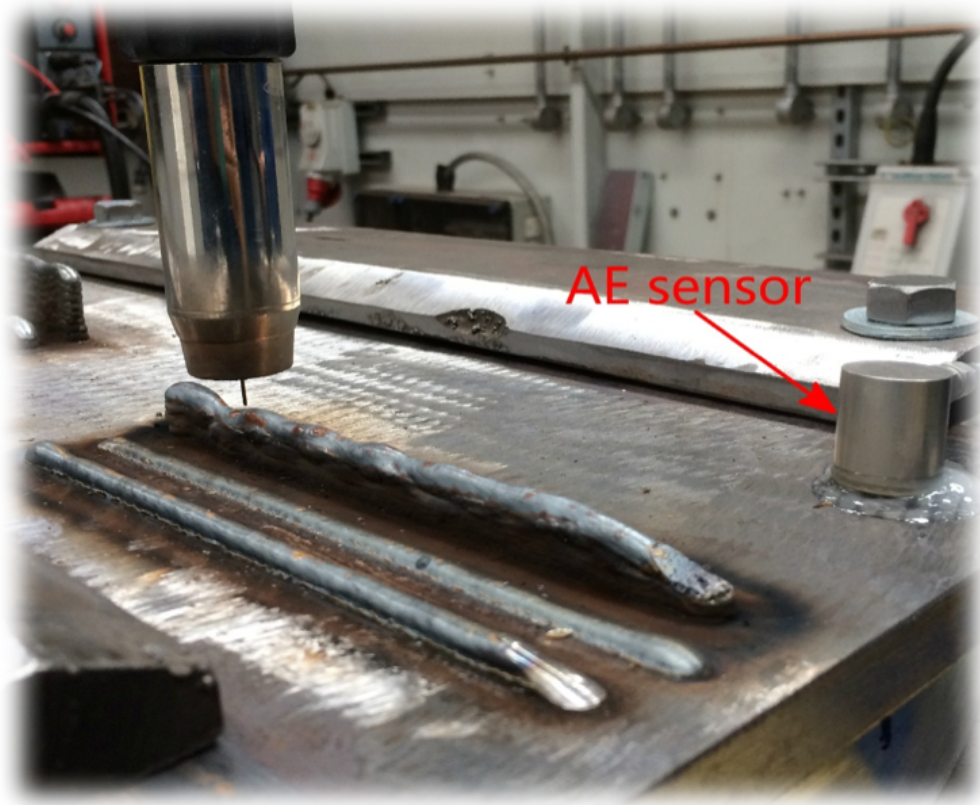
AE sensor attached on one side of the weld.
